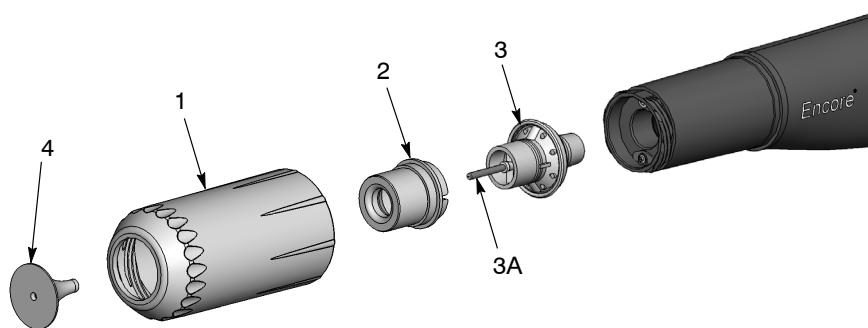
Changing Optional Deflectors and Conical Nozzles
